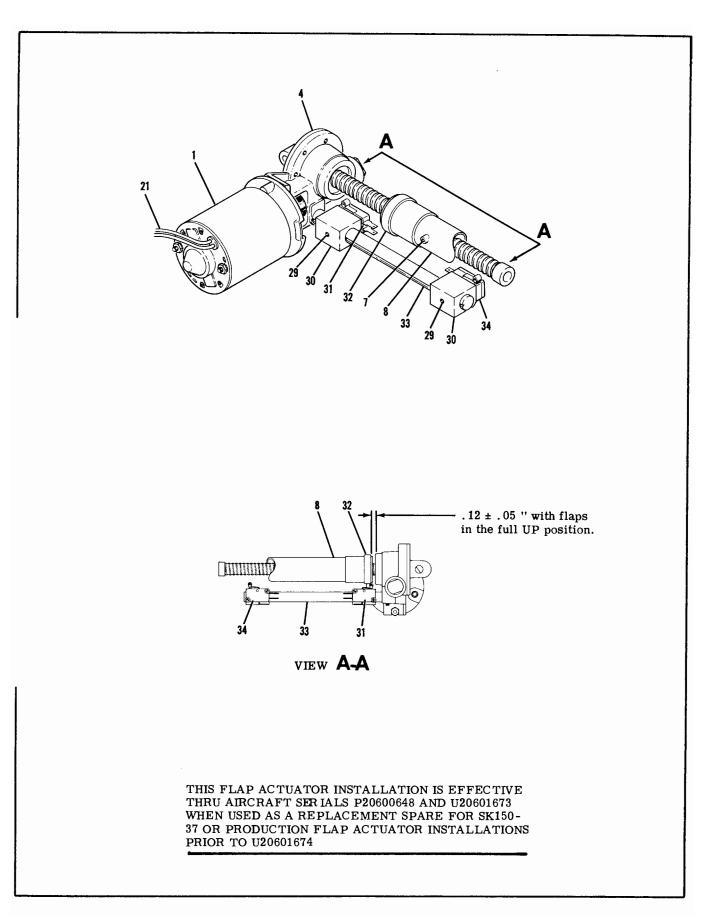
Flap Motor and Transmission Assembly (Sheet 3 of 3)
